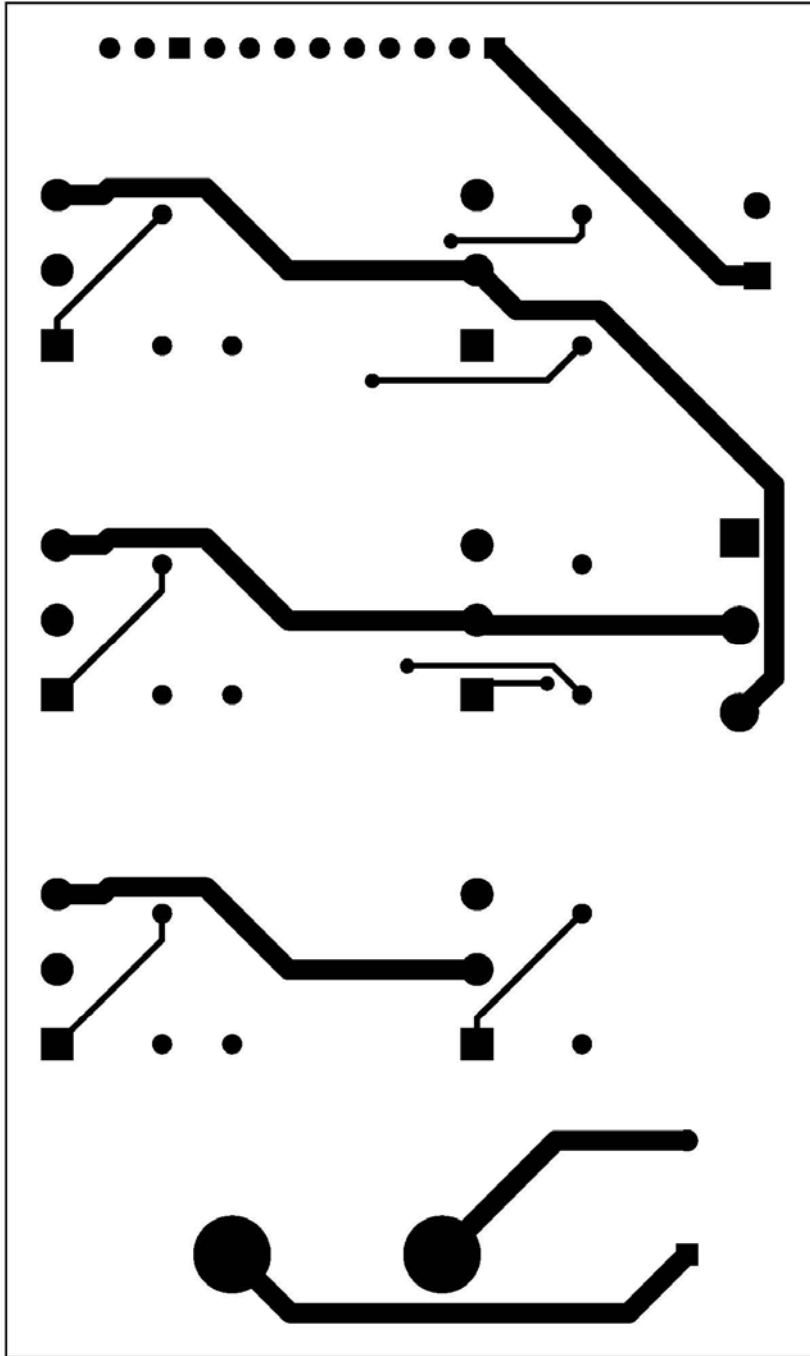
Top layer for power board PCB of 3-phase inverter.
